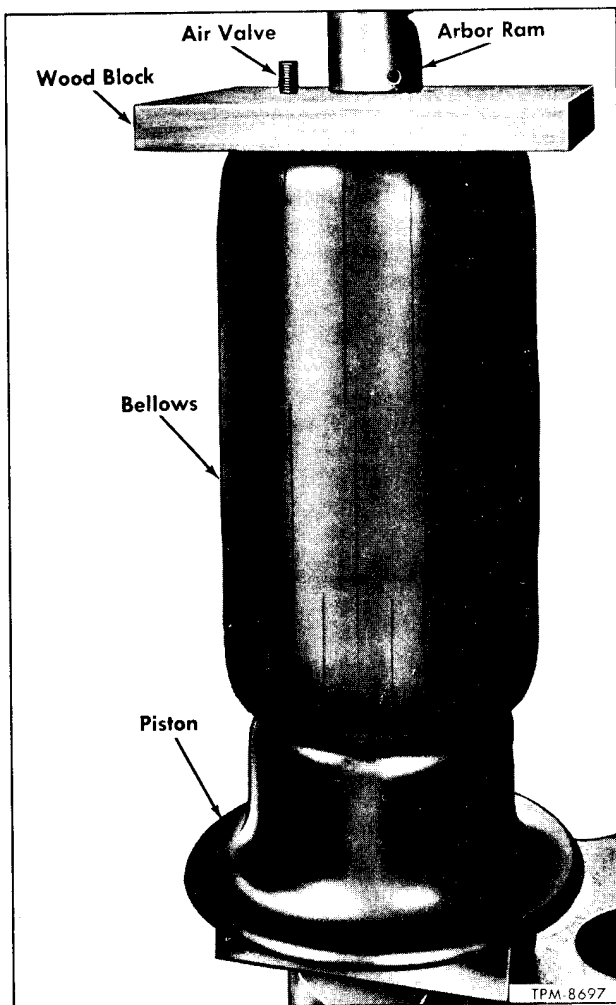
Forming Bellows Loop Over Piston Using Arbor Press
